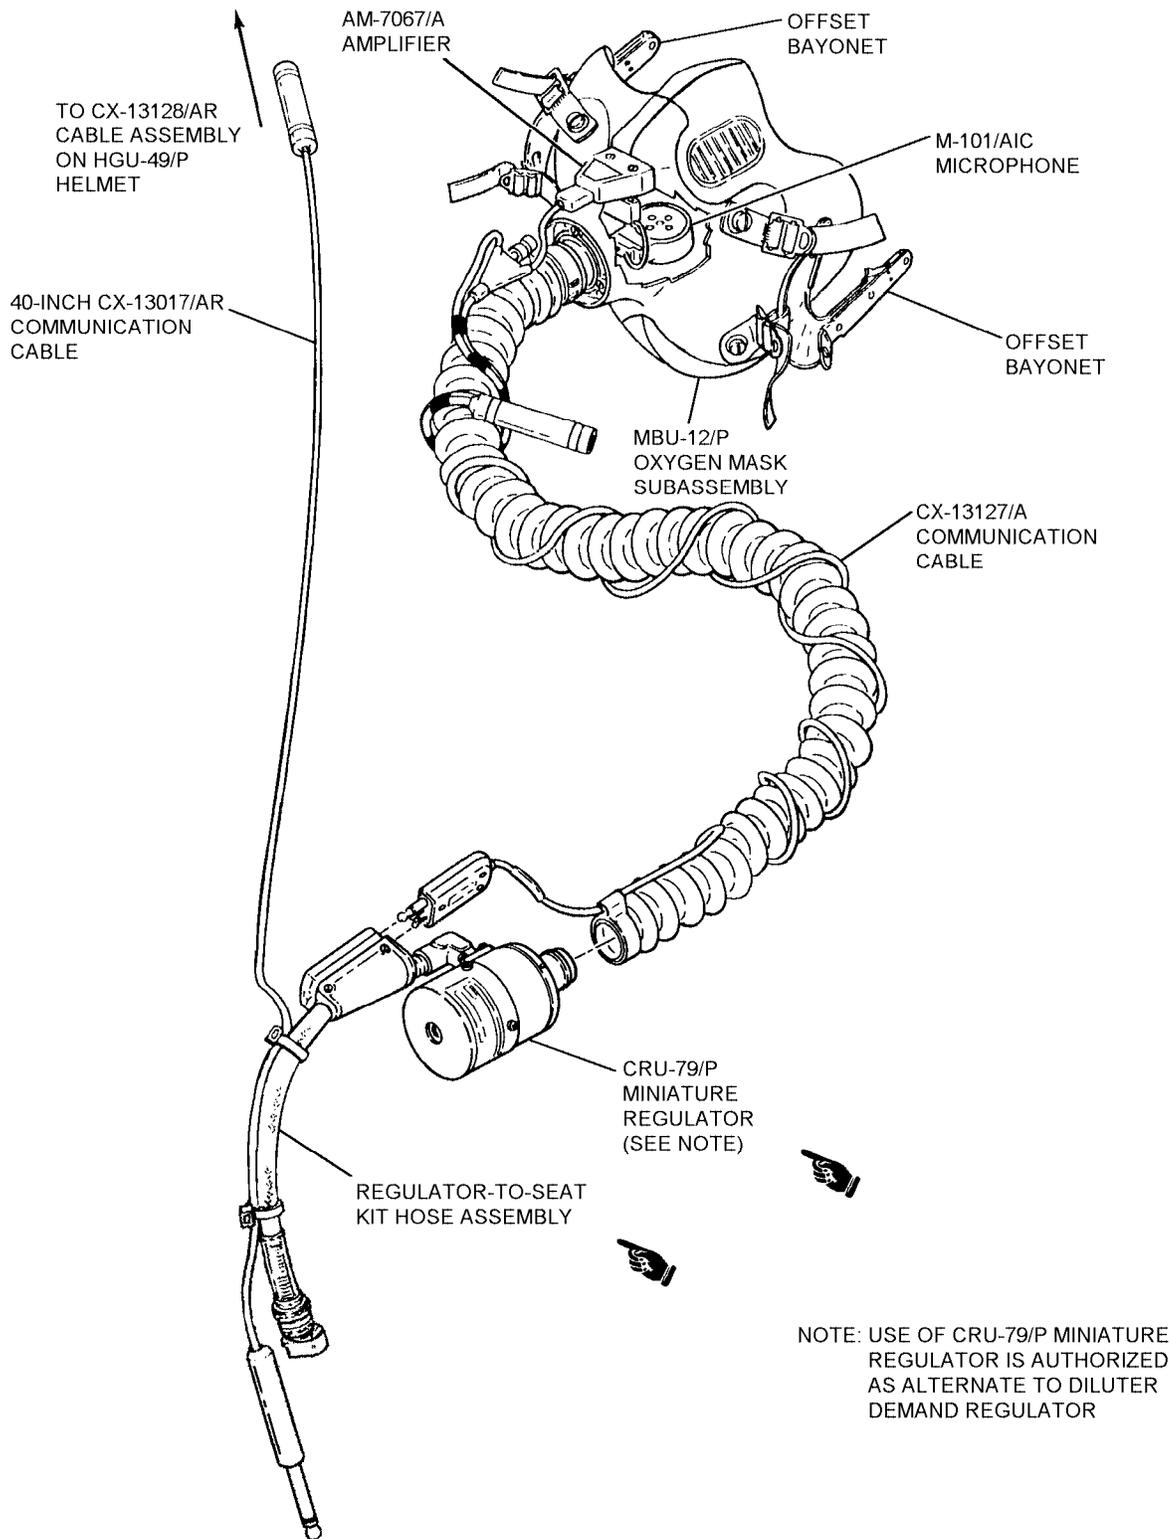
MBU-15/P Oxygen Mask Assembly (S-3 Aircraft)
